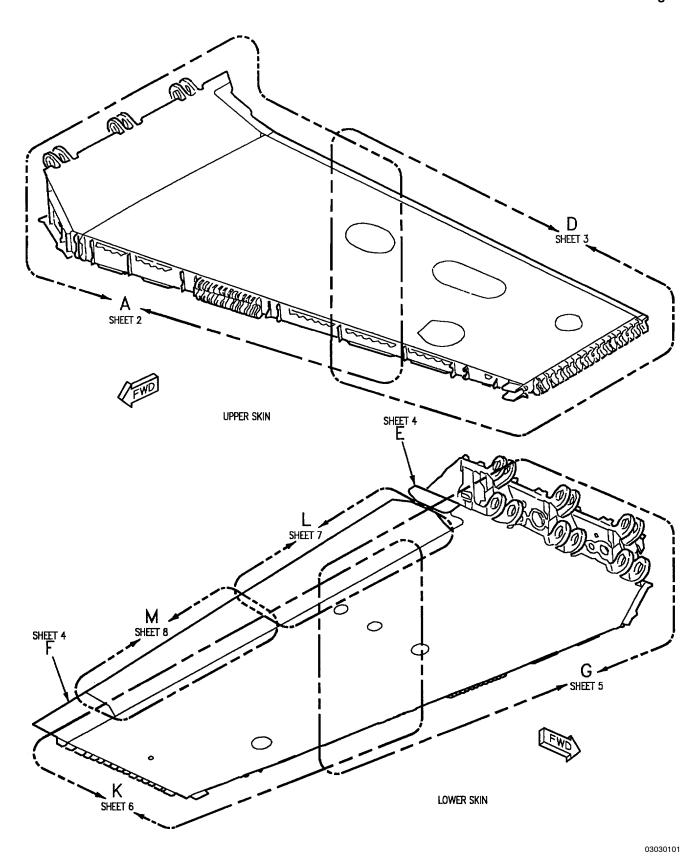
Inner Wing Skins Hole Numbers (Sheet 1)
